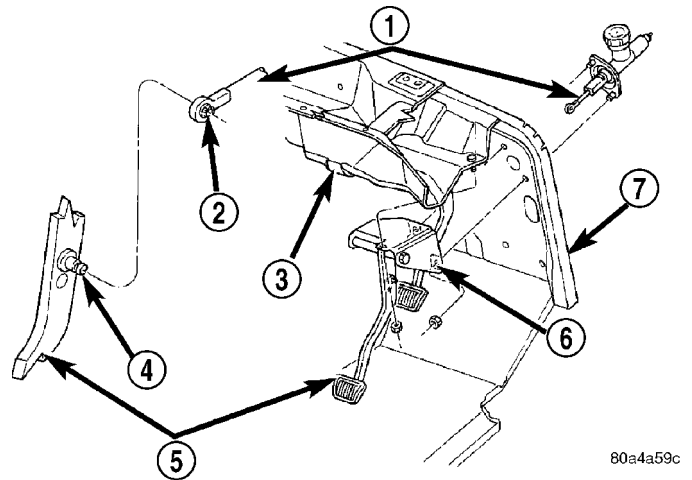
CLUTCH PEDAL MOUNTING - RHD
